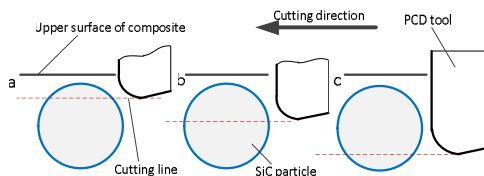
Interaction locations between the tool and particles: (a) tool faces the upper of SiC; (b) tool faces the middle of SiC; (c) tool faces the lower of SiC.
